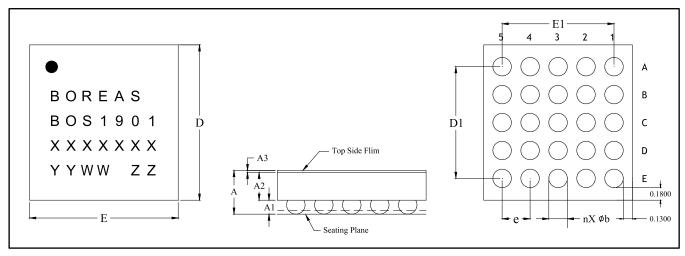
WLCSP 25B 2.1mm × 2.2mm package outline drawing
